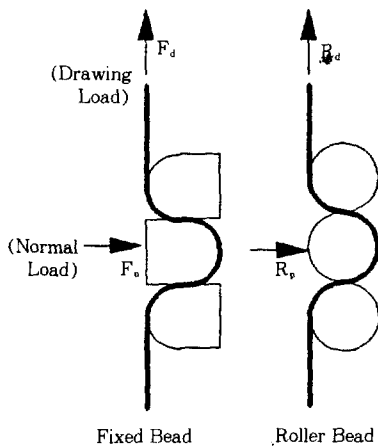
Fixed and roller bead configuration of draw bead simulator.
